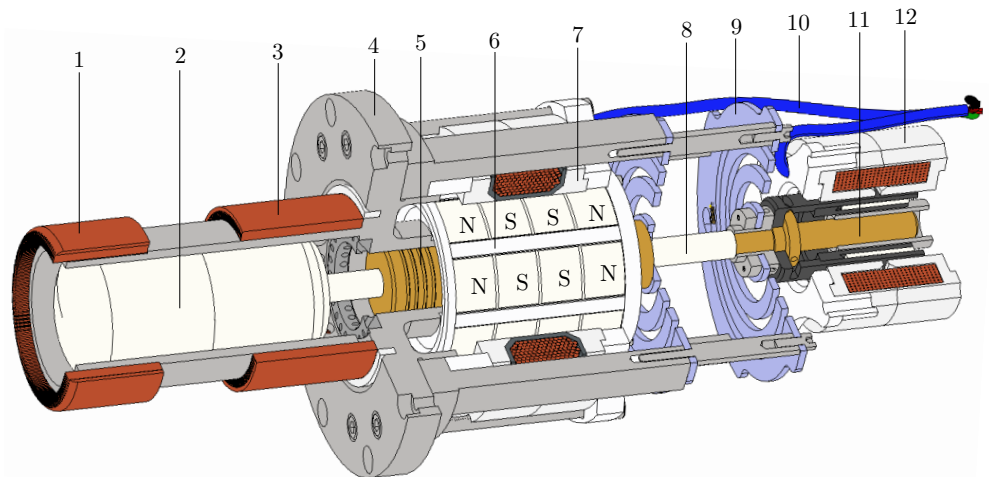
Illustration of the assembled free-piston Stirling engine prototype, depicting the principal engine components
